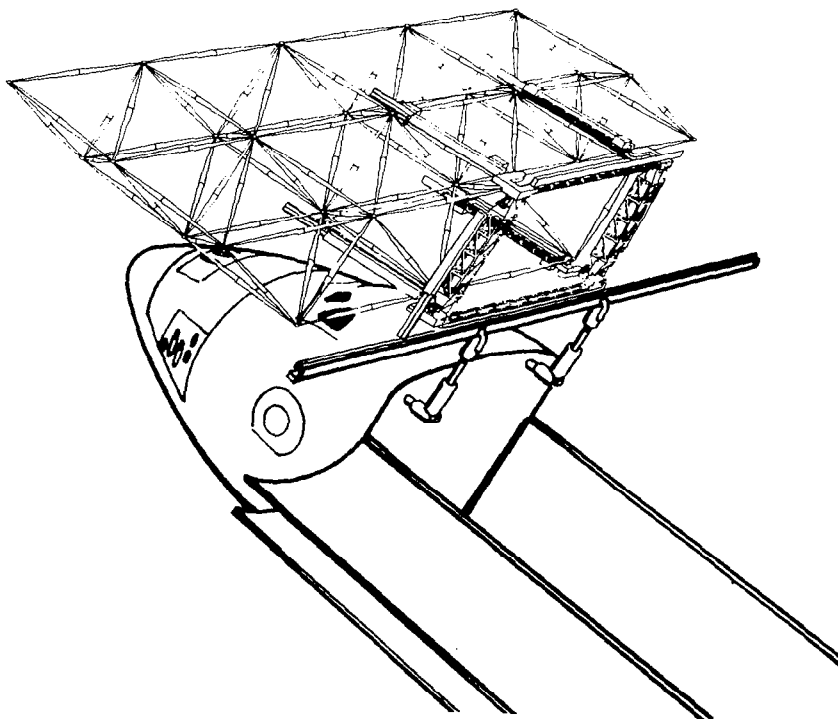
Scaled Down Version of Assembler for 5 m Columns; Installation on Space Shuttle for Fabrication of Small Size Platform.
